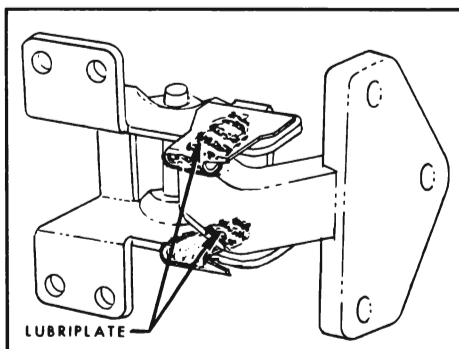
Lubrication of Front Door Hinge and Hold-Open Clips
